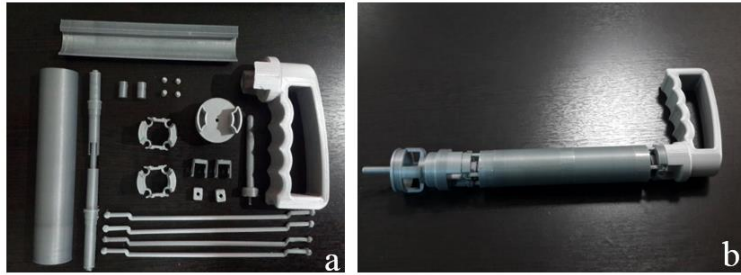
FDM manufactured parts by grey filament PLA (a) and assembled mechanism (b).
